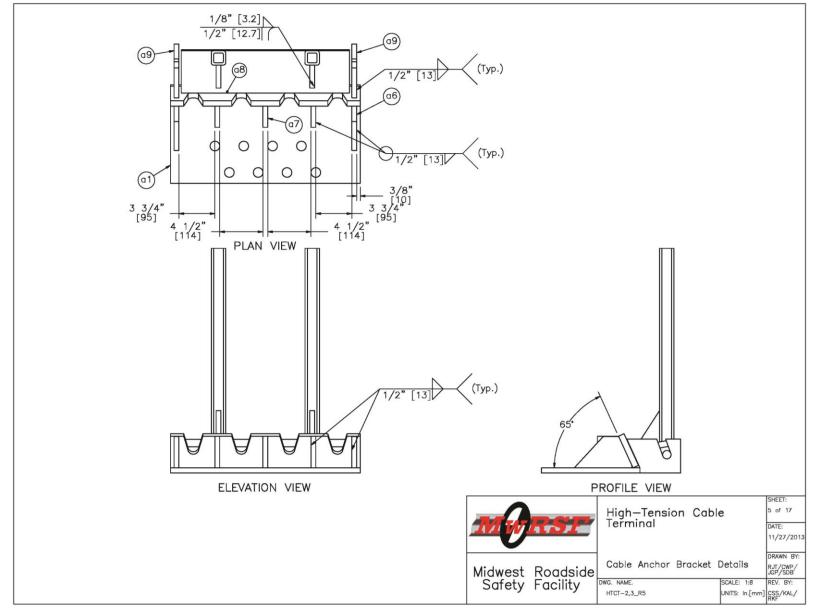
Cable Anchor Bracket Details, Test Nos. HTCT-2 and HTCT-3
